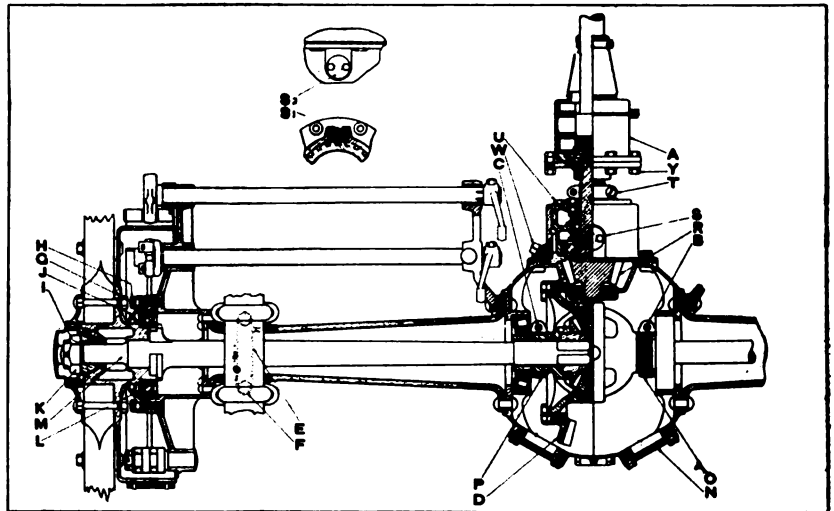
Premier Rear Axle, with Components, Utilized in Adjusting, Lettered.
